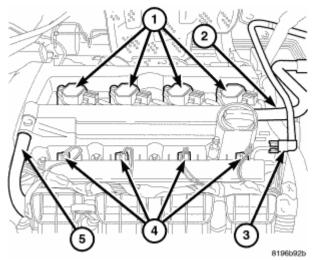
COIL CONNECTOR Courtesy of CHRYSLER LLC
